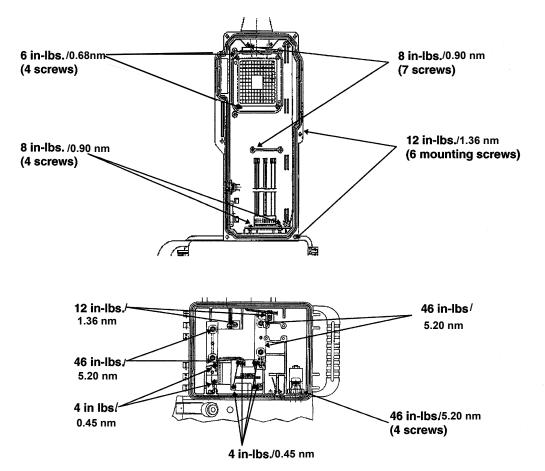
Torque Requirements for Back Panel and Electronic/Mechanical Assemblies
